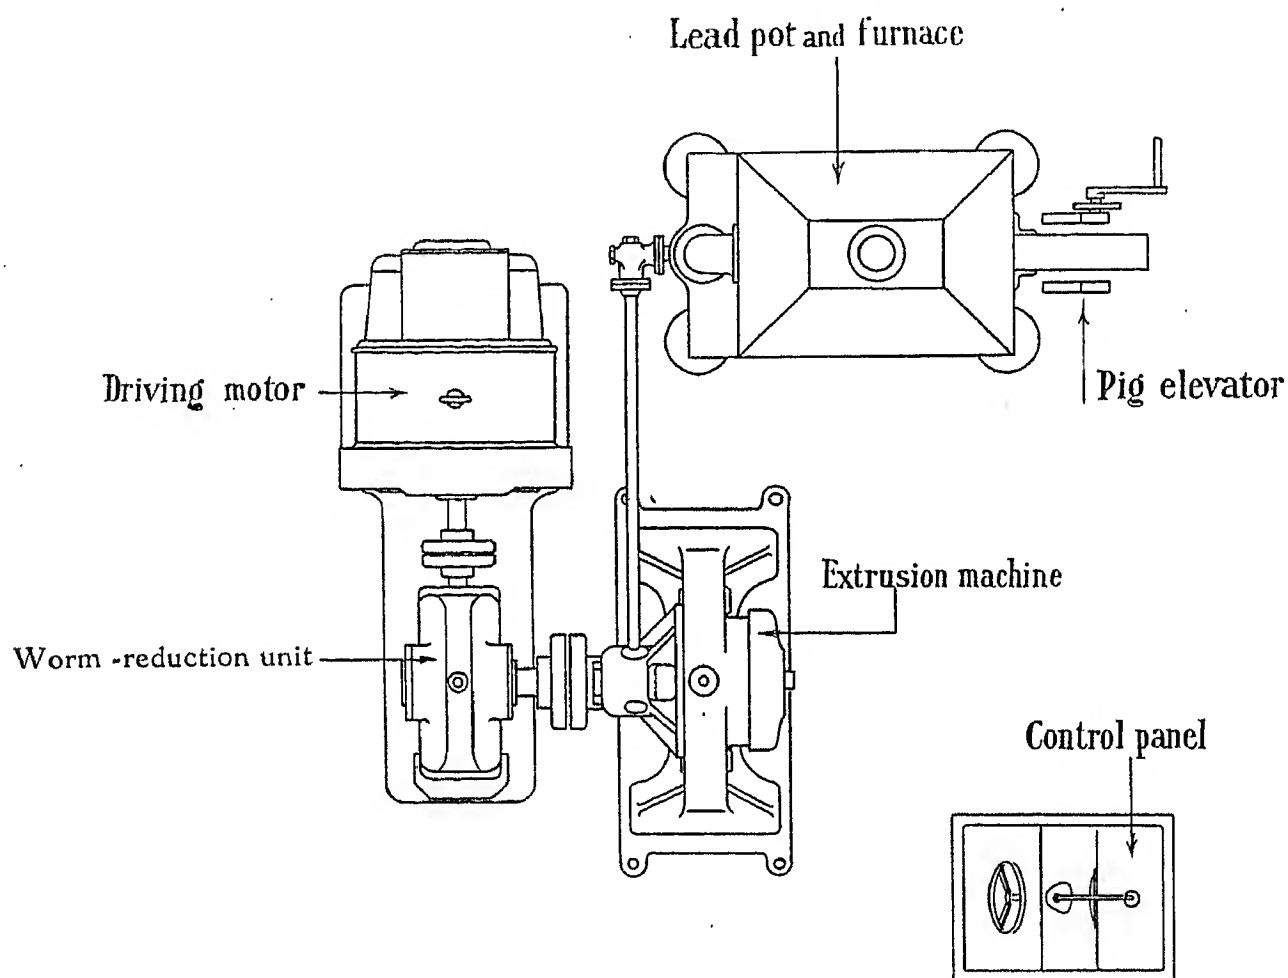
General layout of Henley lead-extrusion machine, showing electric drive.
